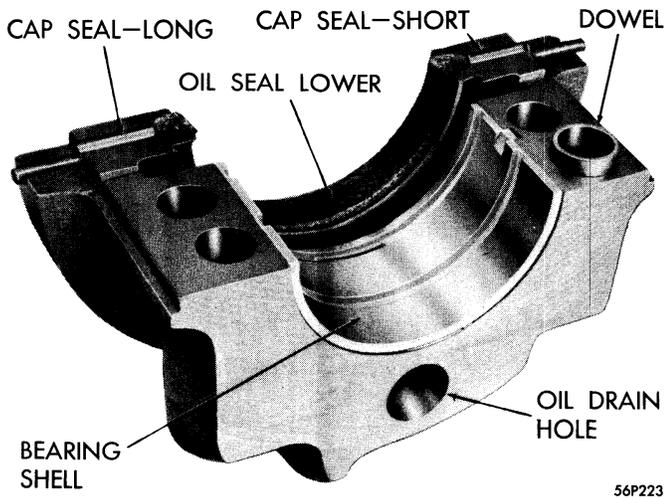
Rear Main Bearing Cap and Seals—277, 301 and 318 Cubic Inch V-8 Engine
